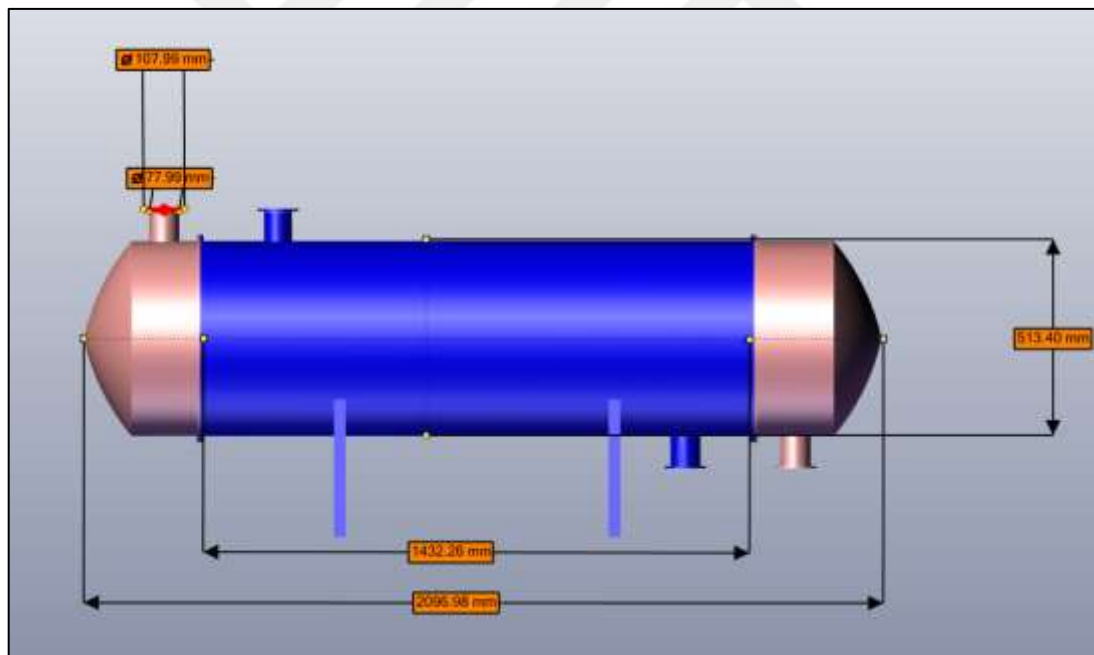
Shell and Tube Heat Exchanger Dimensions for the Outer Shell and Inlets and Outlets.
